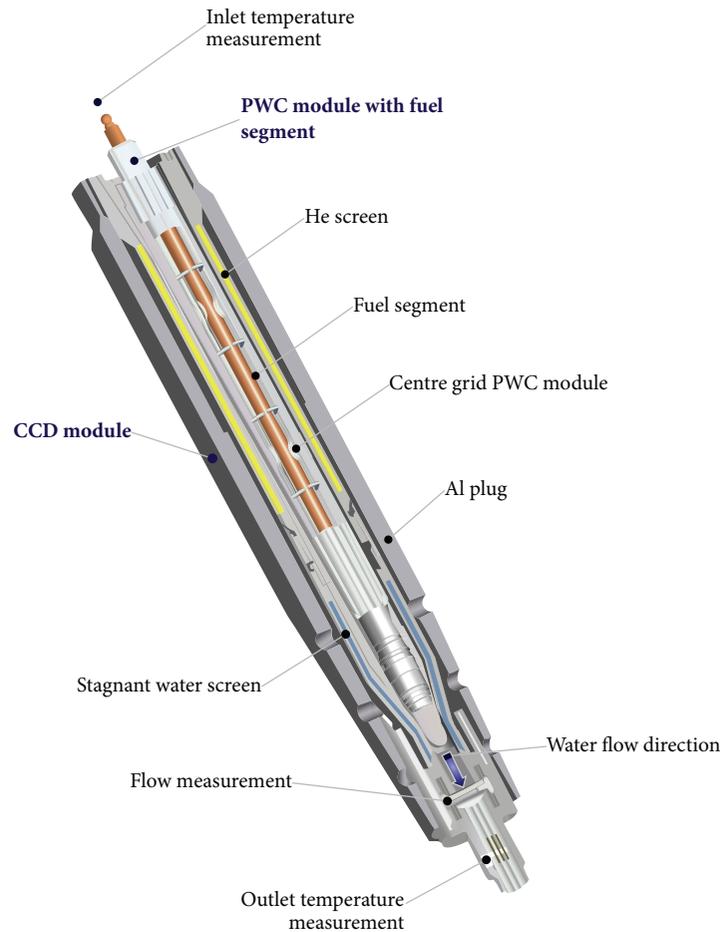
Exploded 3D view of the PWC/CCD assembly [26].
